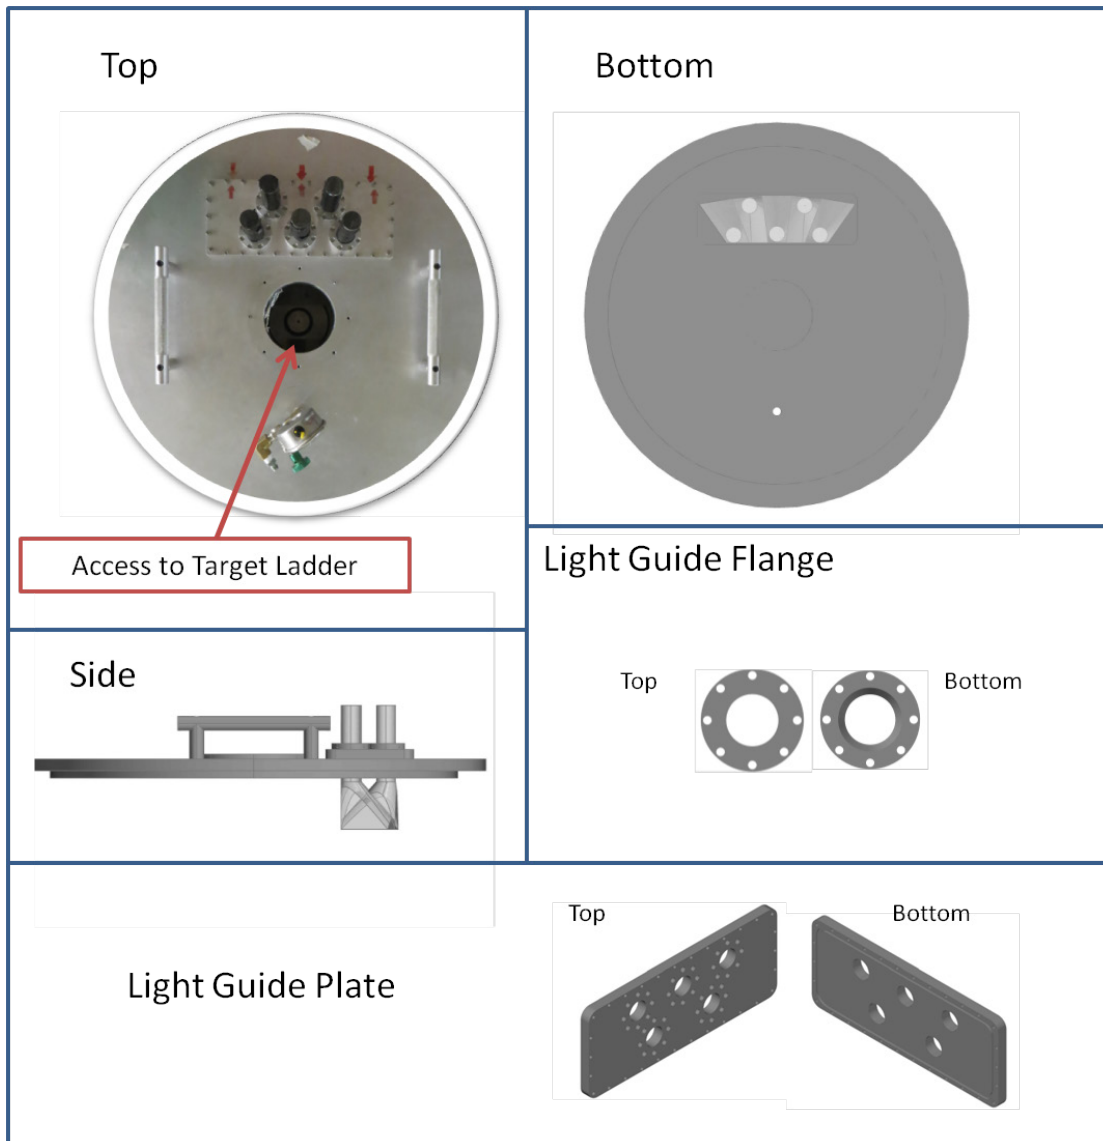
Views of the target chamber lid and its components. E blocks are fixed to the light guide plate by the light guide flanges.
